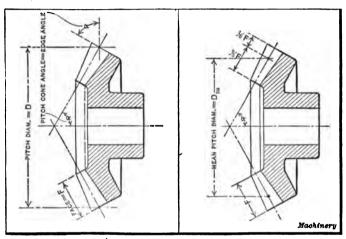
Gear Dimensions required to determine Radial Pressure and End Thrust
